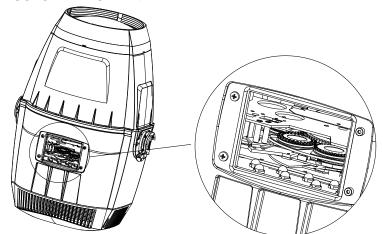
remove the housing at bottom-half of the head after loosening 4 screws of A, B, C and D. Pull out the fan assembly after unfastening screw E for the assembly and the cover for lamp chamber can be seen then. Figure2: Open fan mounting construction, loosen 6 screws for lamp chamber cover, remove the cover and ensure the seal for the cover doesn't fall off. Figure3: loosen 4 screws for tightening plate for the lamp, push the lamp toward one side of strip-shaped hole till it can be removed and unplug both lamp wires. Install a new lamp, plug both lamp wires, close the lamp chamber cover, fasten its screws and ensure the seal in the right place. At last restore the head's original appearance after installing other components.
